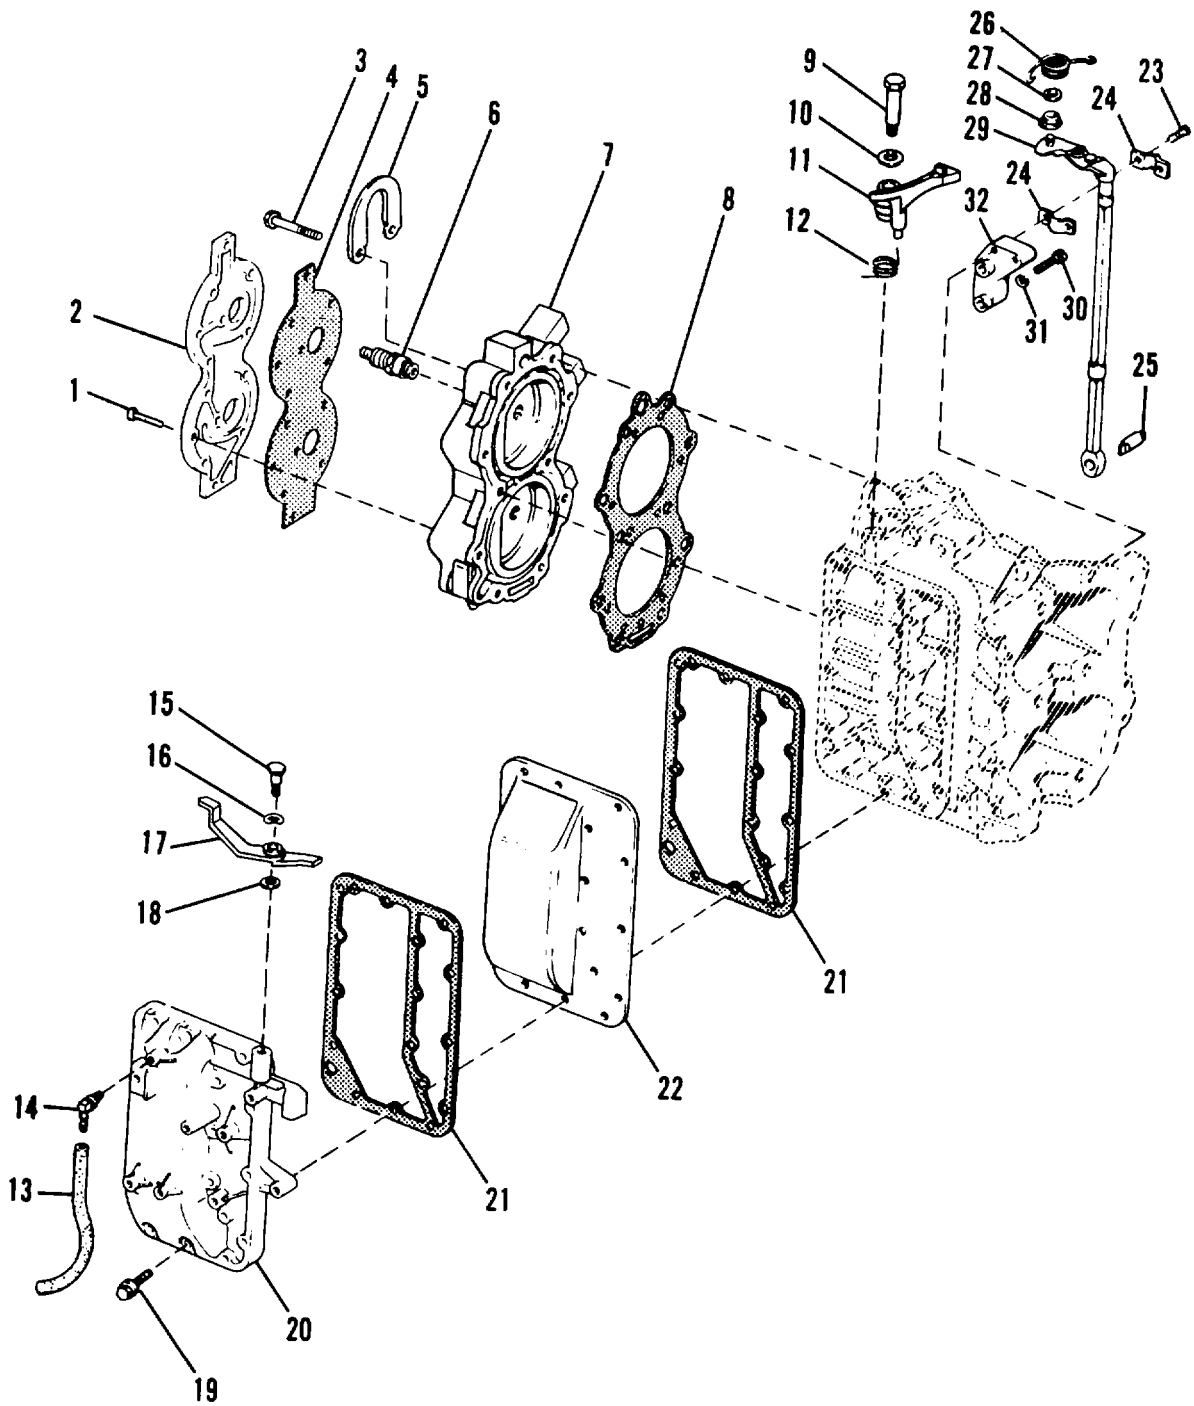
Cylinder and Crankcase (Sheet 1 of 2)
